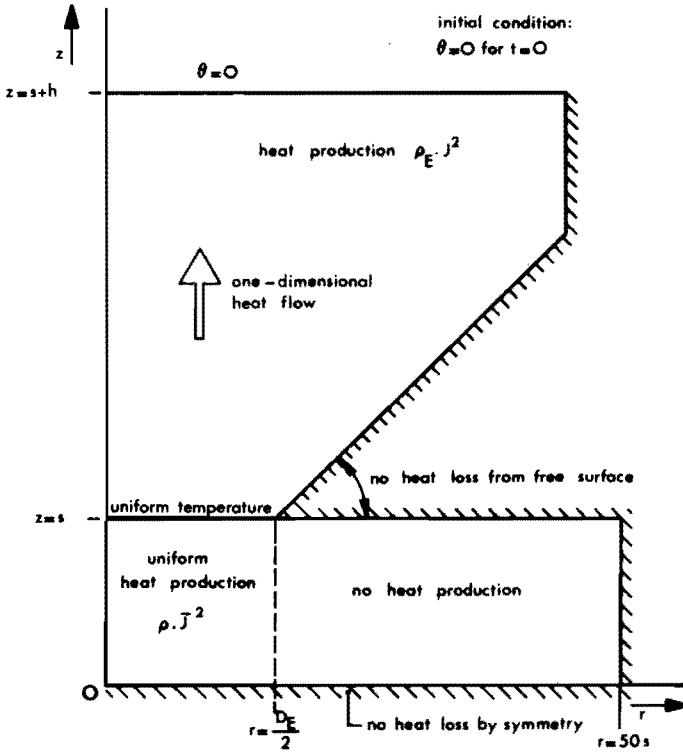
Cross-section of the Mathematically Relevant Part of the Weld.
